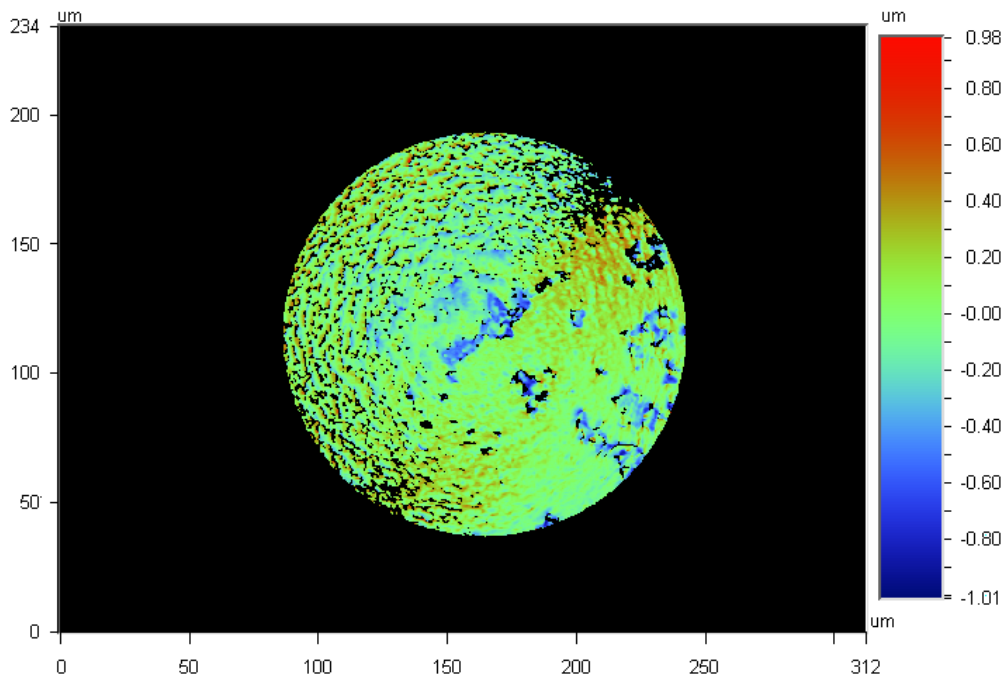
Surface Topology of Ball from Bearing with Oil that Failed
